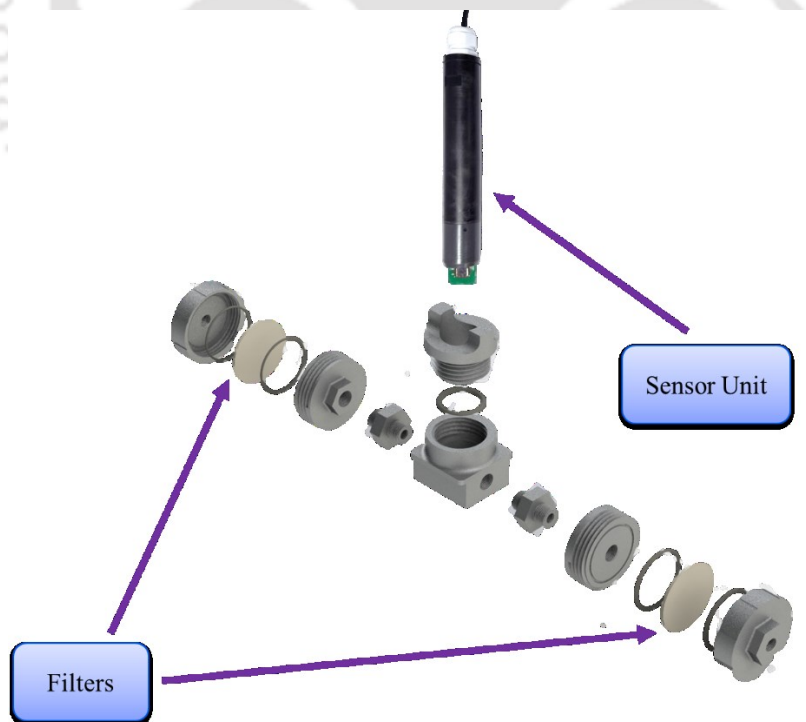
Exploded view of the filter-sandwiched sensor housing.
